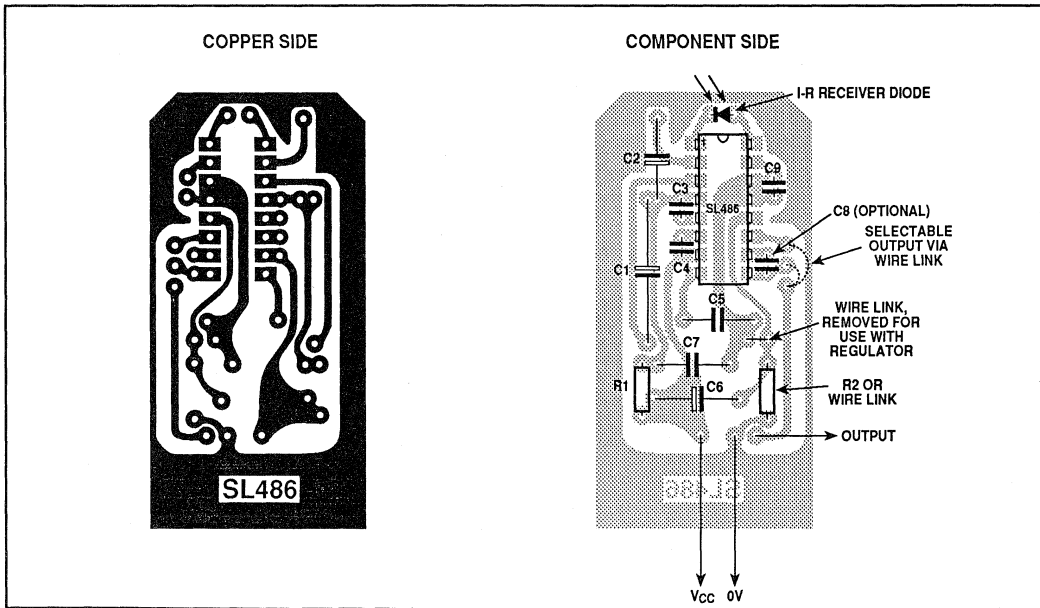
PCB track (actual size) and component layout for the circuit of Fig. 4, using SL486 in DP16 package
